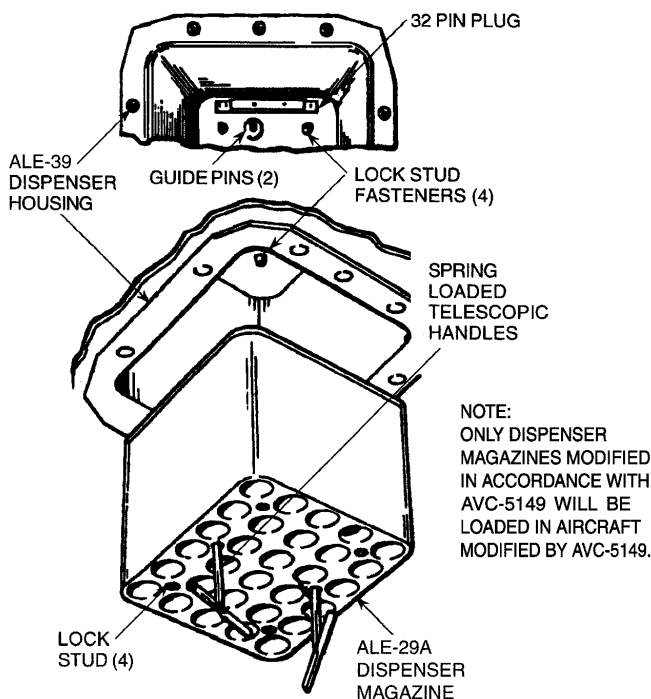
ALE-29A Dispenser Magazine and ALE-39 Dispenser Housing
